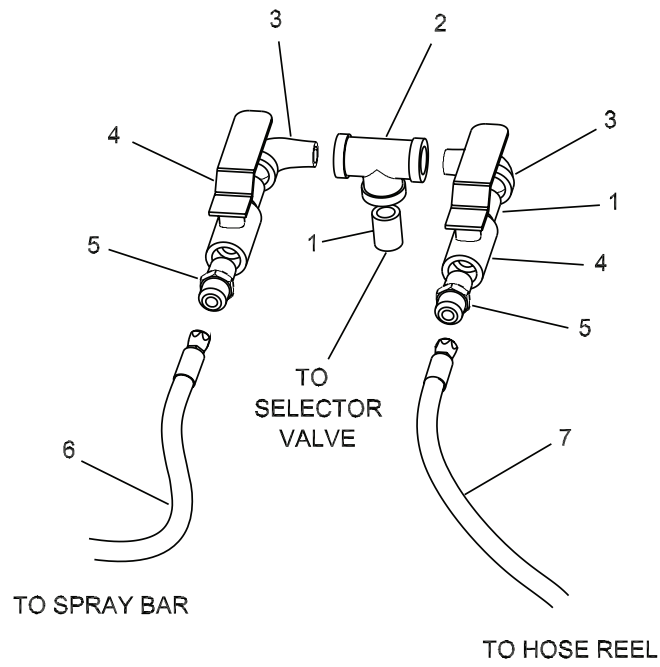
SPRAY SELECT VALVE ASSEMBLY, SKID
